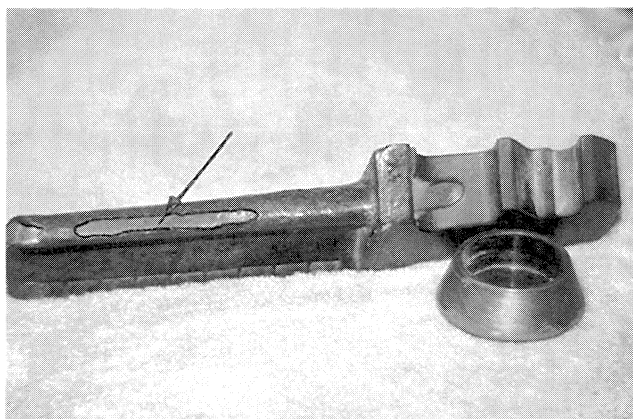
Hot Corrosion Damage Showing Total Defeat of the LE Cooling Hole.
